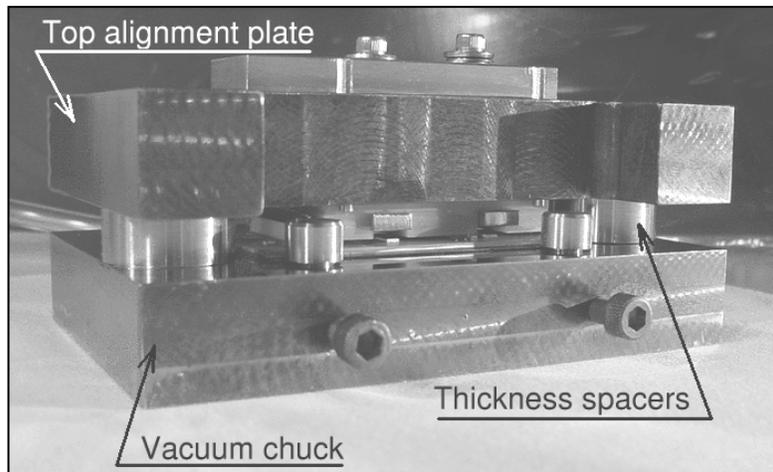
The final gluing jig is shown with the CCD held to the bottom by a vacuum and the mounting foot held to the top using screws and the captured nuts. The spacers define the overall package thickness.
